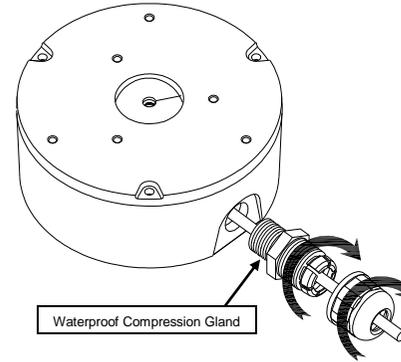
SIDE CONDUIT INSTALLATION
